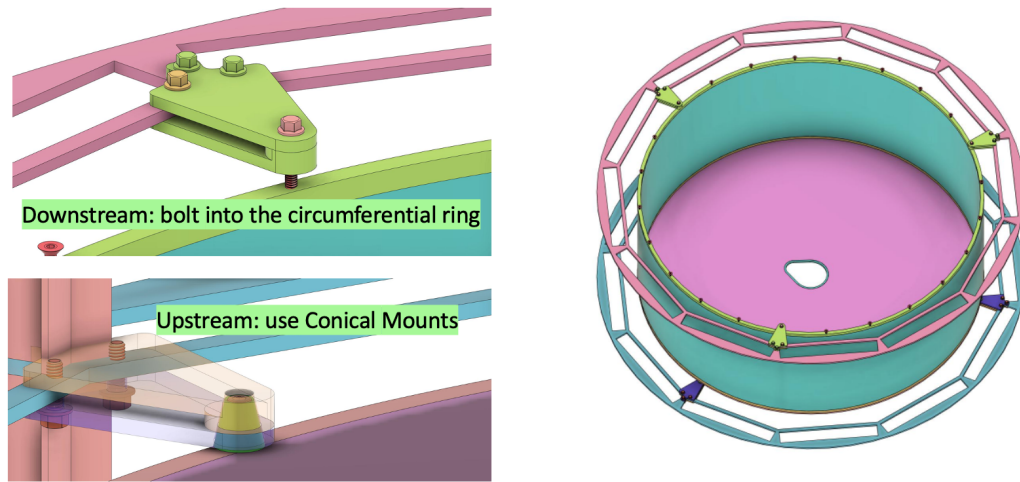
pFRICH vessel mounting scheme. Bottom left and top left: see the text for more details. Right: location of the upstream and downstream mounting fixtures on the vessel.
